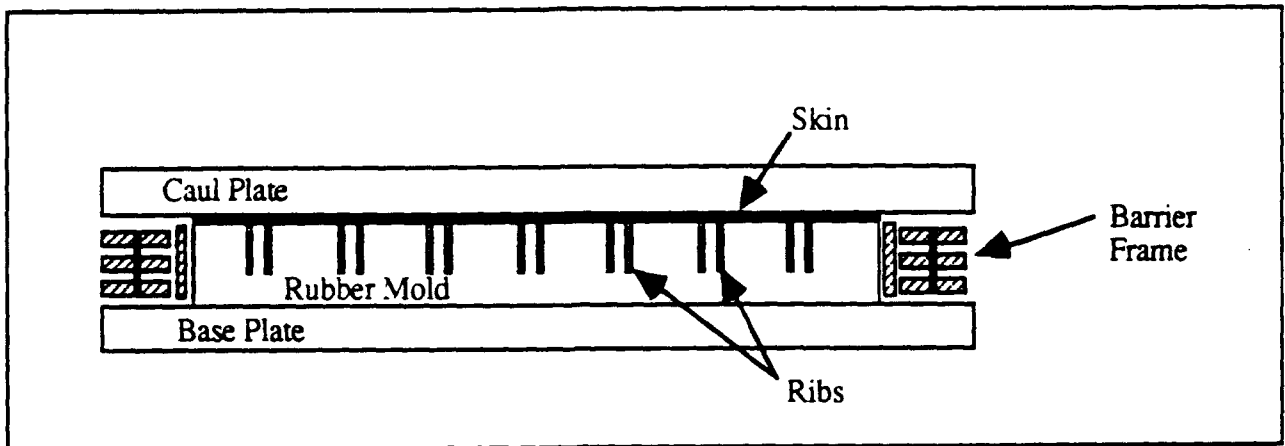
Alternate tooling ("barrier-frame" setup) used in original manufacturing of isogrid panels. The base plate was 0.5 in thick K-100 aluminum and the caul plate was 0.5 in thick tool steel. The barrier frame completely surrounded the rubber mold and was made of 0.25 in thick by 1.375 in wide steel strips, shown in cross-section above. The strips were pinned together but were not attached to either of the plates.
